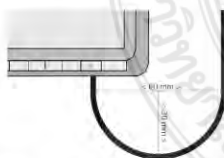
Minimum bend radius of 30 mm and cable exiting the junction box
